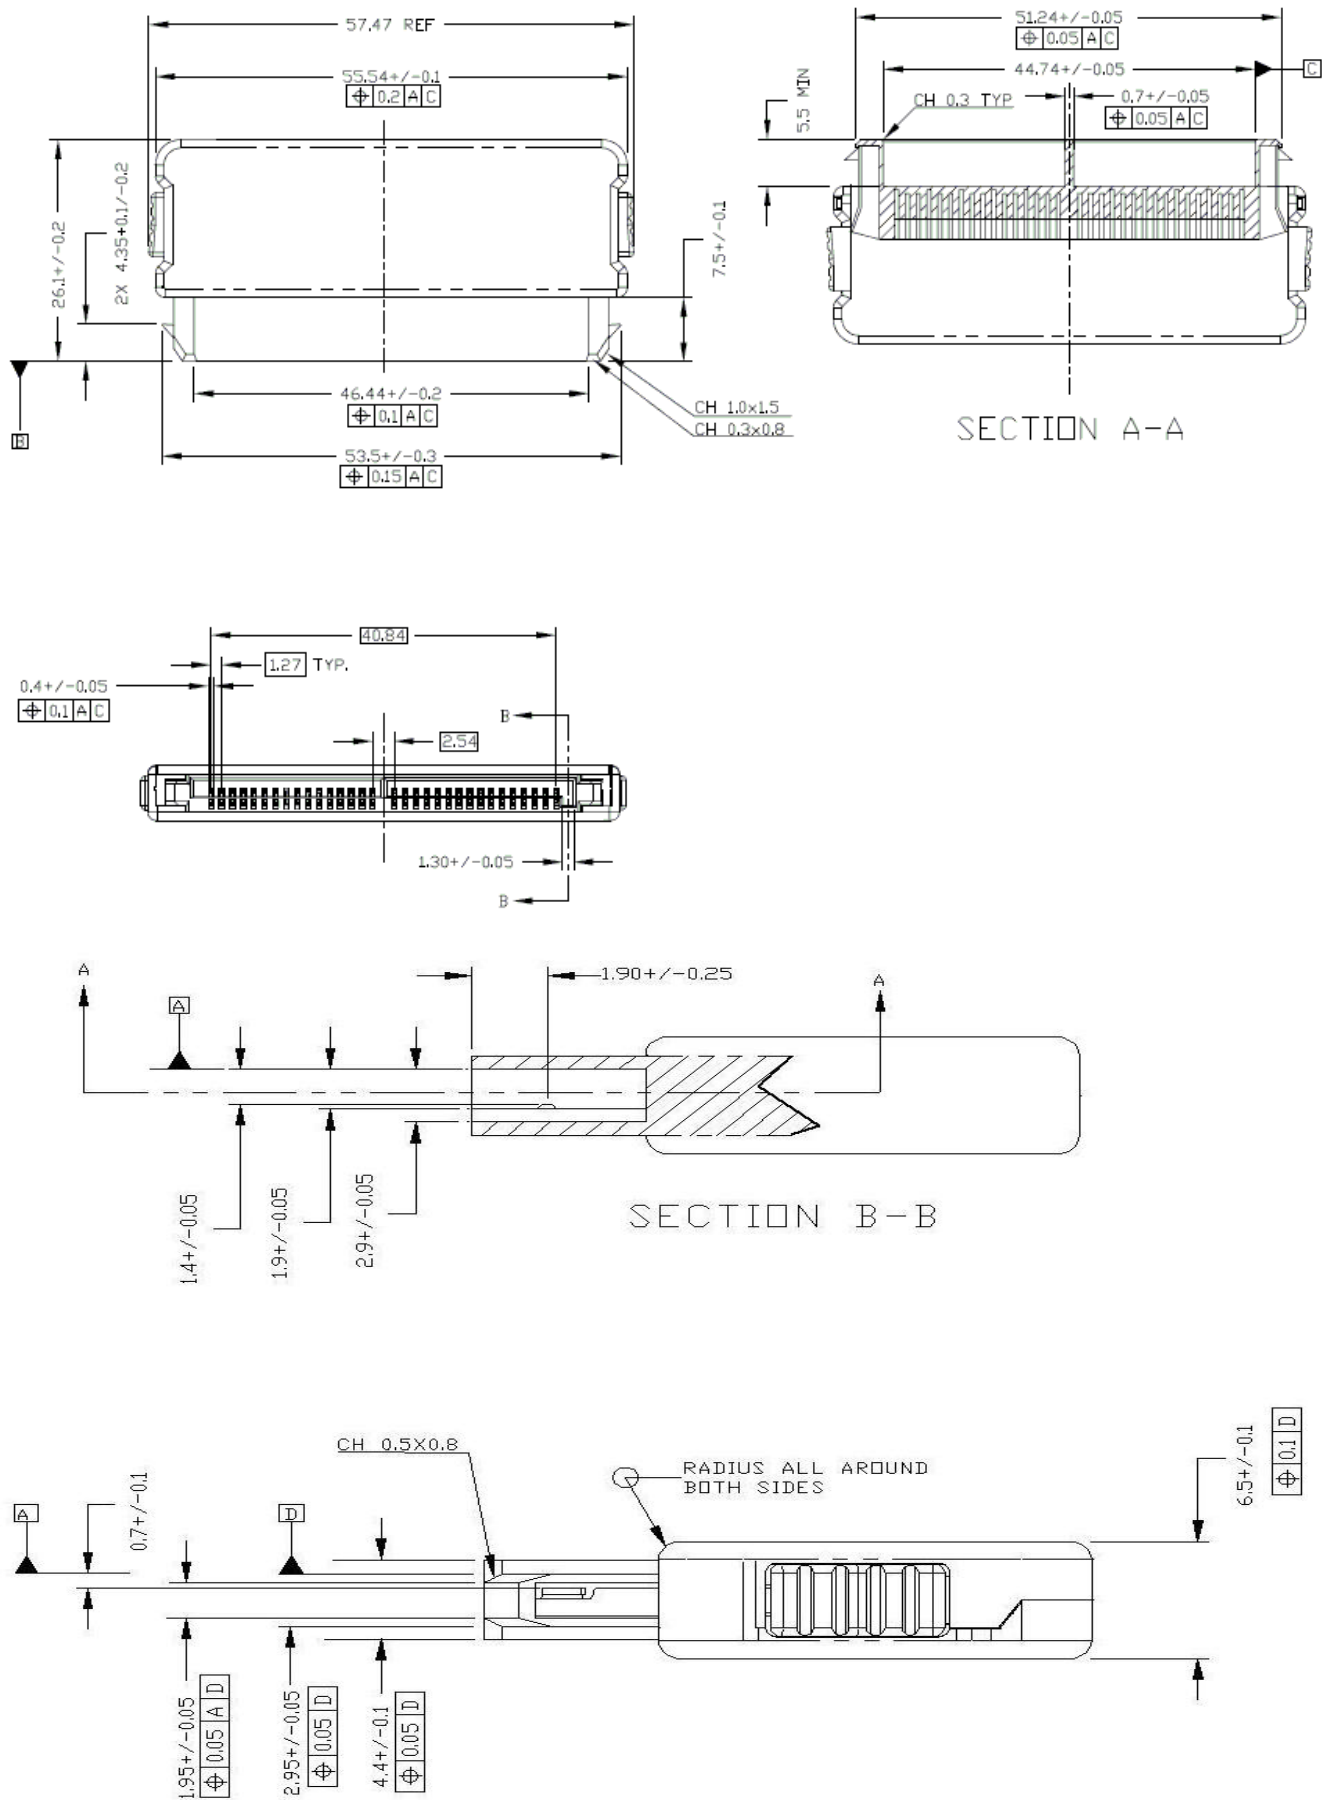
4 Lane Cable Fixed (Receptacle) Dimensions Including Backshell
